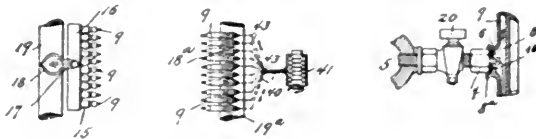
The Denis Machine for Producing Threads from Collodion.
